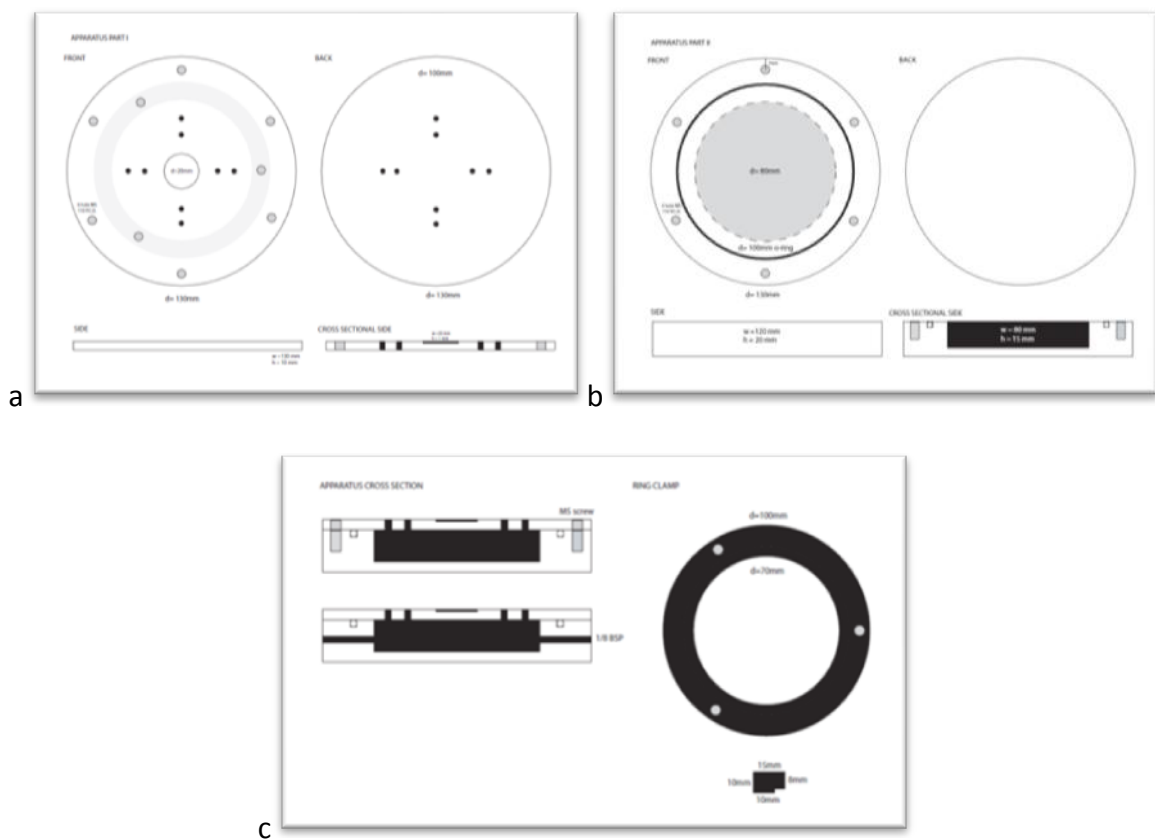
Design of a) sample holding piece b) solvent reservoir piece and c) a ring clamp.
